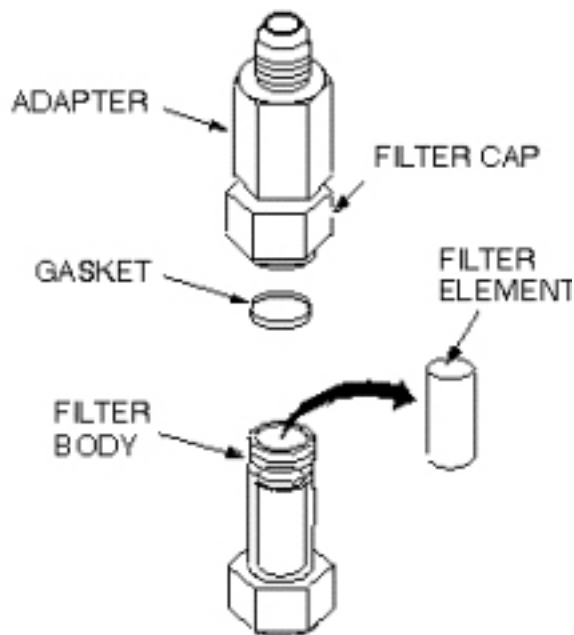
LOCATION OF HYDRAULIC FILTER
